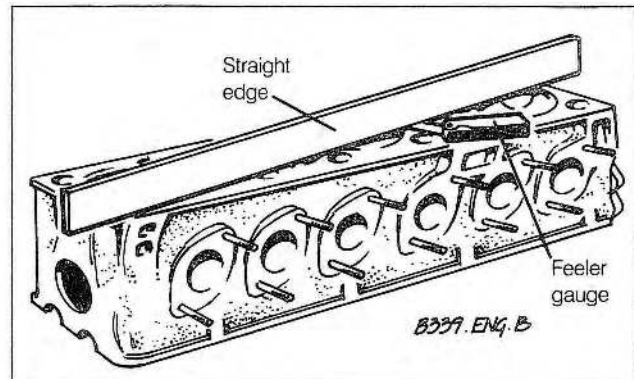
Straight edge and feeler gauge being used to check straightness of cylinder head gasket surface.
